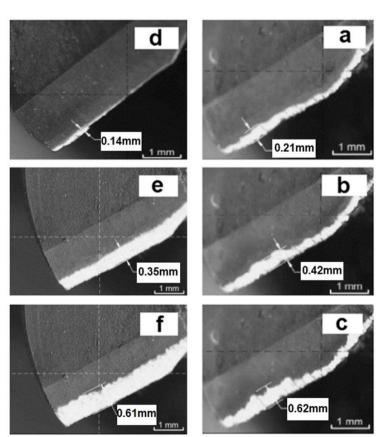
Comparing flank wear of drills, right uncoated drill and left drill with three layer coating
